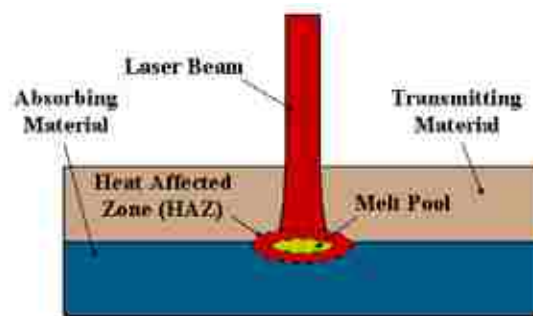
Infrared/laser transmission welding (LTW)
